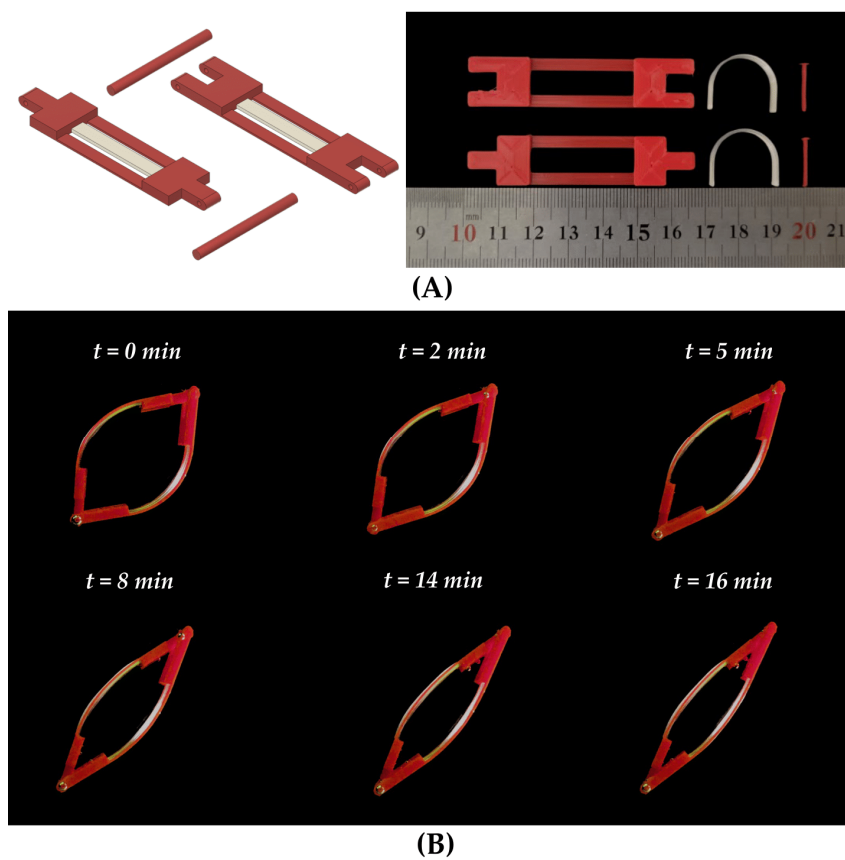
(A) CAD models & prototypes and (B) shape-morphing test for actuator 39.
